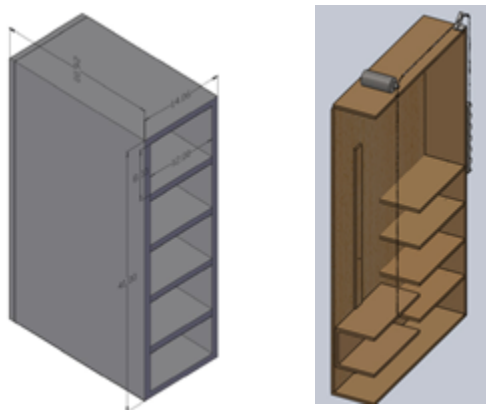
Layout design and Cross-sectional view of Prototype Multi-level car parking using AutoCAD and Solid works
